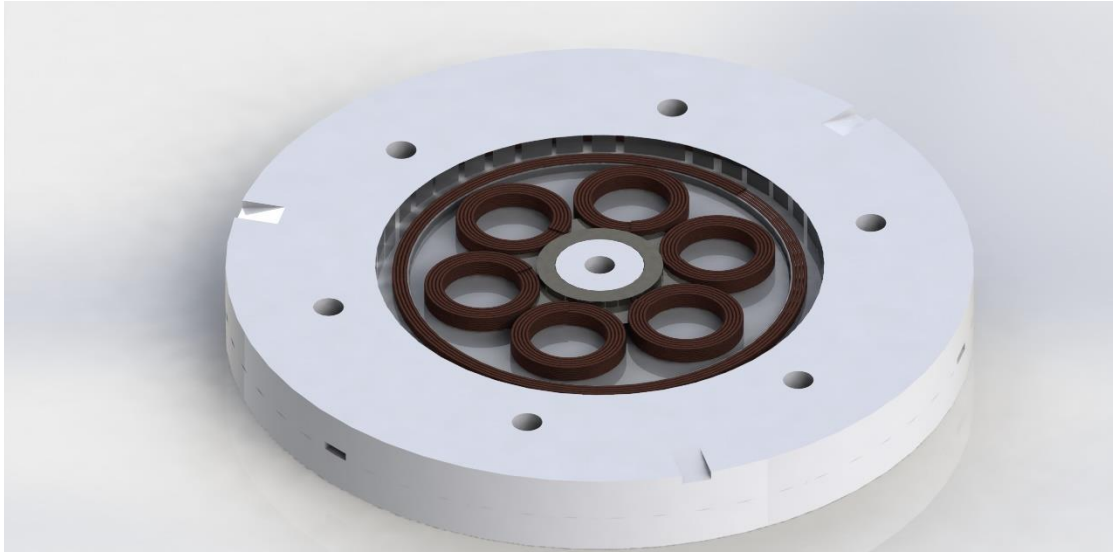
Complete Rotor Disk, In Resin Coating. Still In Cast Form.
